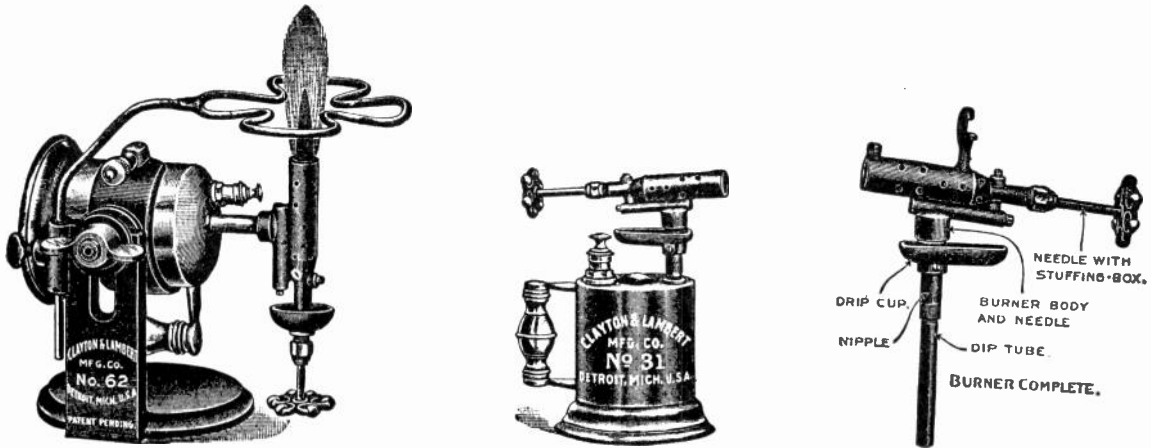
This view shows the important parts of a blow torch on the right, and at the left the method of using a blow torch in a special stand for heating a lead melting pot.
